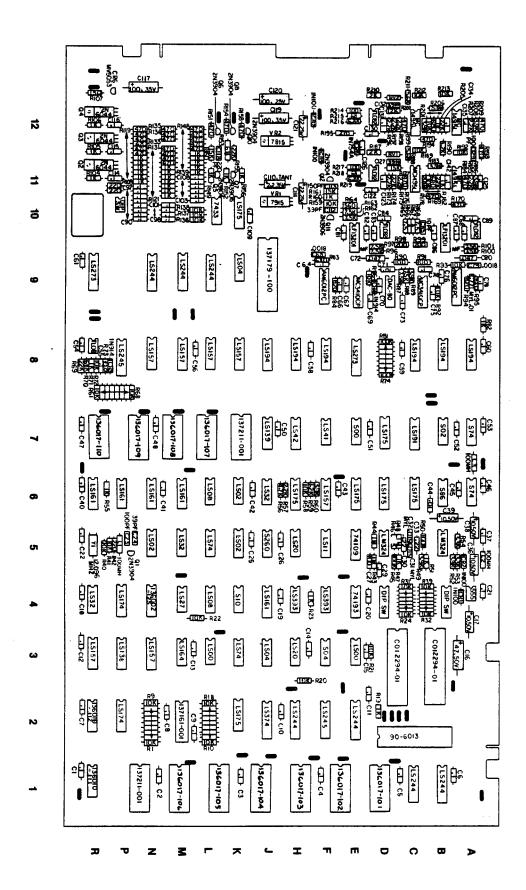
Black Widow Game Printed-Circuit Board Assembly
